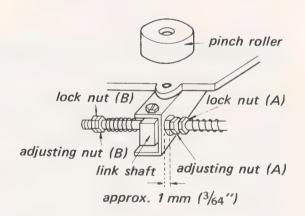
Pinch roller pressure adjustment (1)
